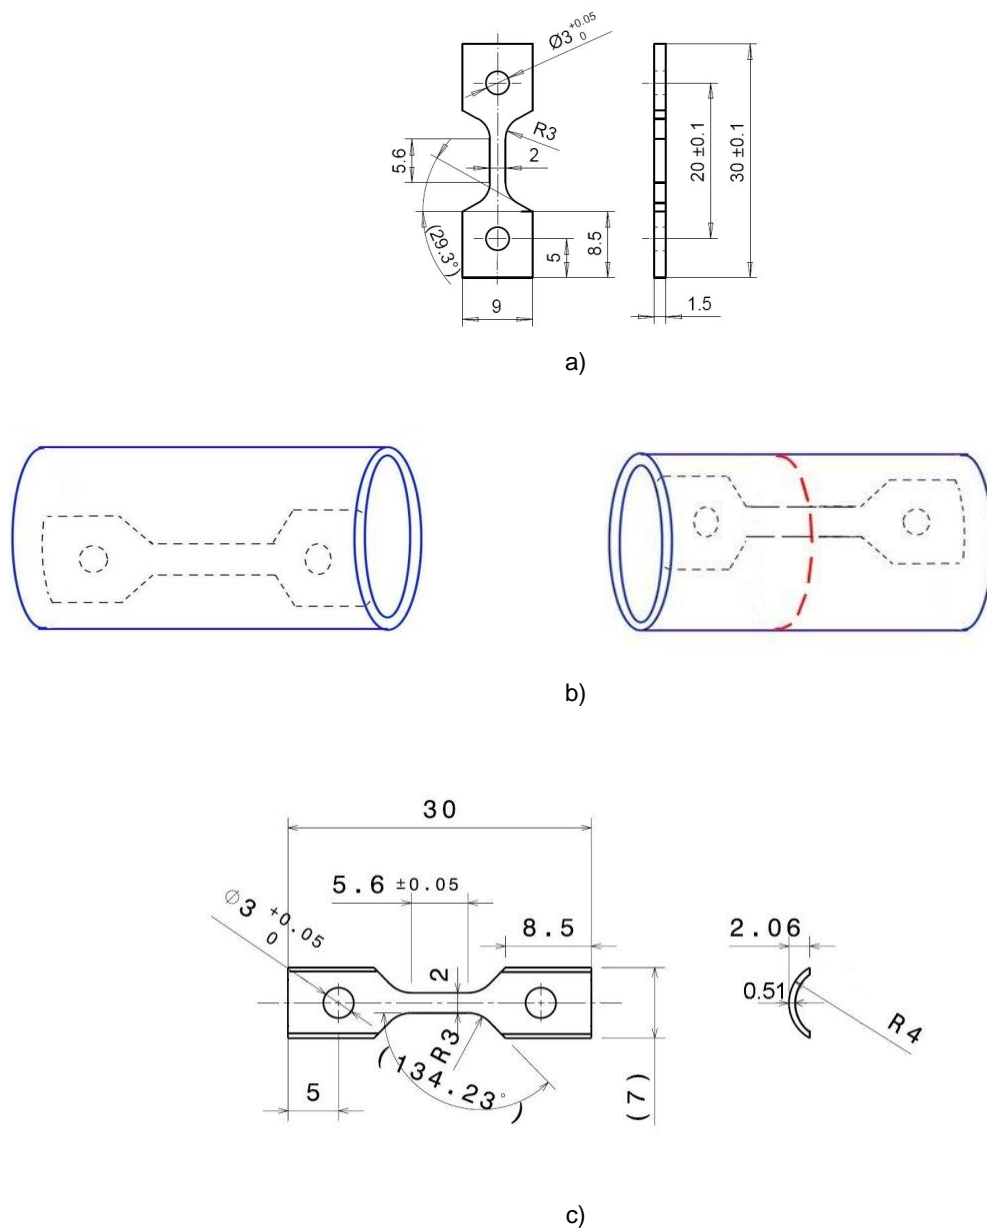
Geometry of the plate type specimen cut from larger samples used in most of the tests a) cutting schematic of specimens from as-received or shot peened $\sim 8 \times 0.5$ mm tube (left hand side) and from a tube that had a circumferential TIG weld in it (right hand side) b) and geometry of the specimens cut from the $\sim 8 \times 0.5$ mm tube.
